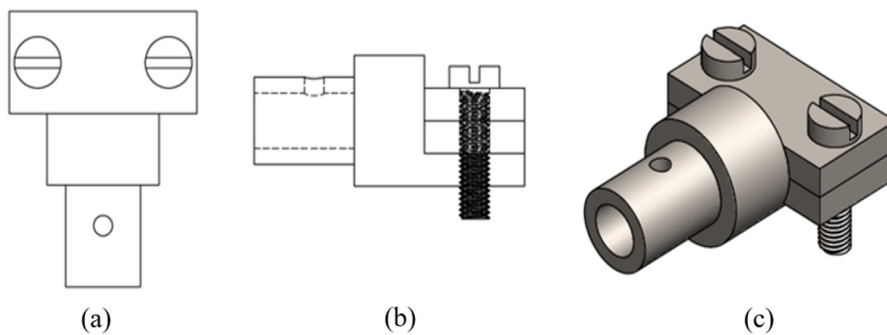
Jaws to hold the membrane specimens. (a) top view, (b) right view, (c) isometric view.
